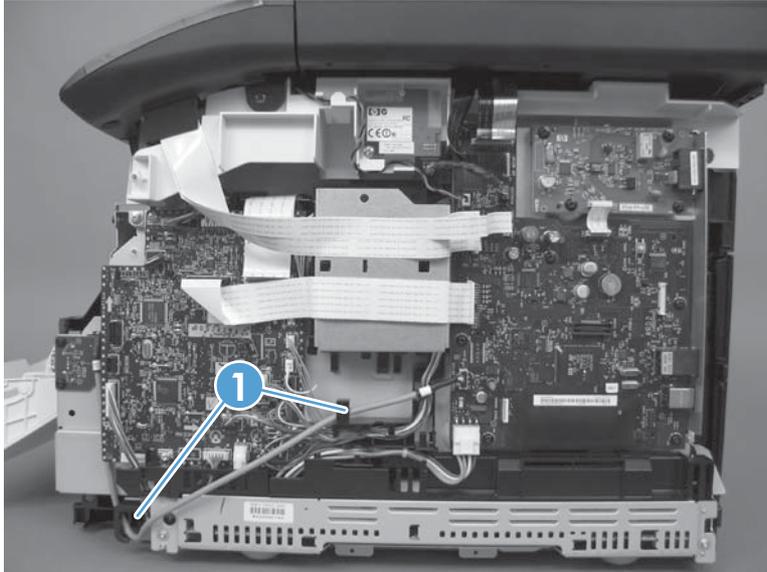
Remove the USB port PCA and bracket (3 of 3)
